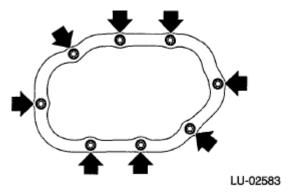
Locating Oil Separator Cover Bolts Courtesy of SUBARU OF AMERICA, INC.
